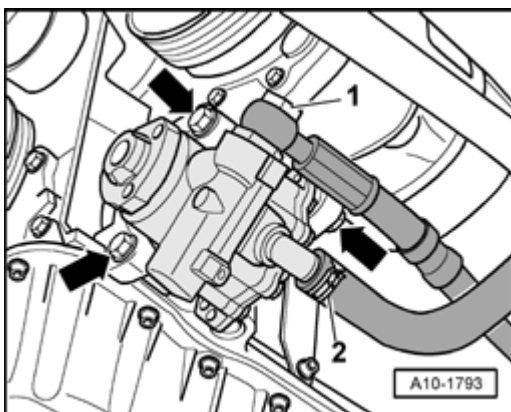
Removing Bolts And Power Steering Pump From Bracket
